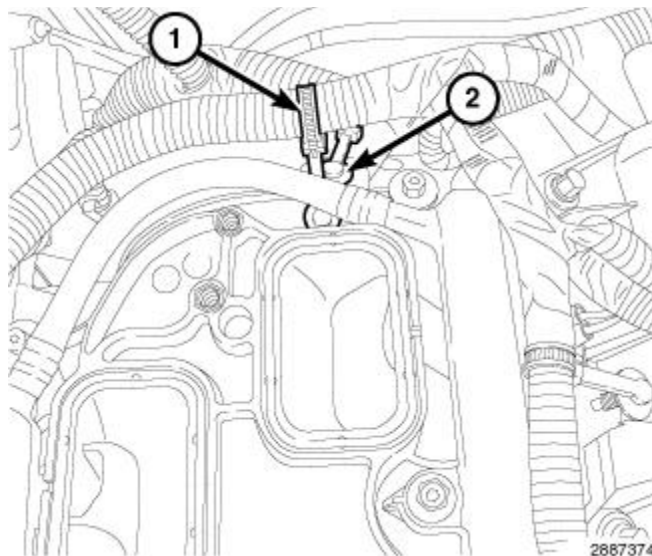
Injection/Ignition Harness Retainer & Main Wire Harness Retainer
